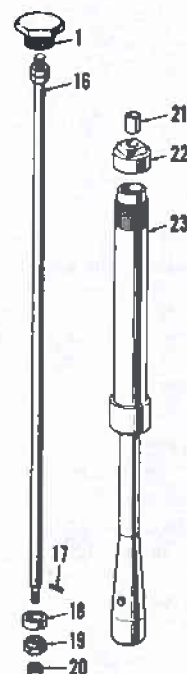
View of restrictor valve used on some models. Body (23) is attached to lower tube (15—Fig. TM4-15) with screw (9—Fig. TM4-15) and must be removed before disassembling.
